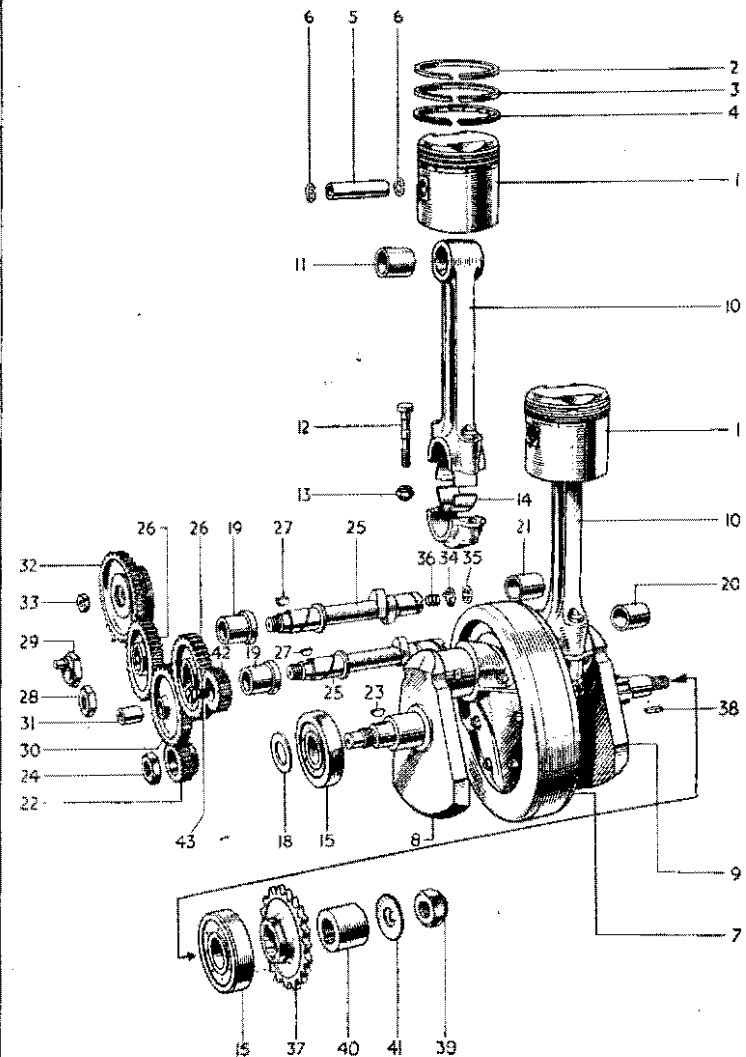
CRANKSHAFT, CONNECTING RODS, PISTONS, TIMING GEARS, etc.
